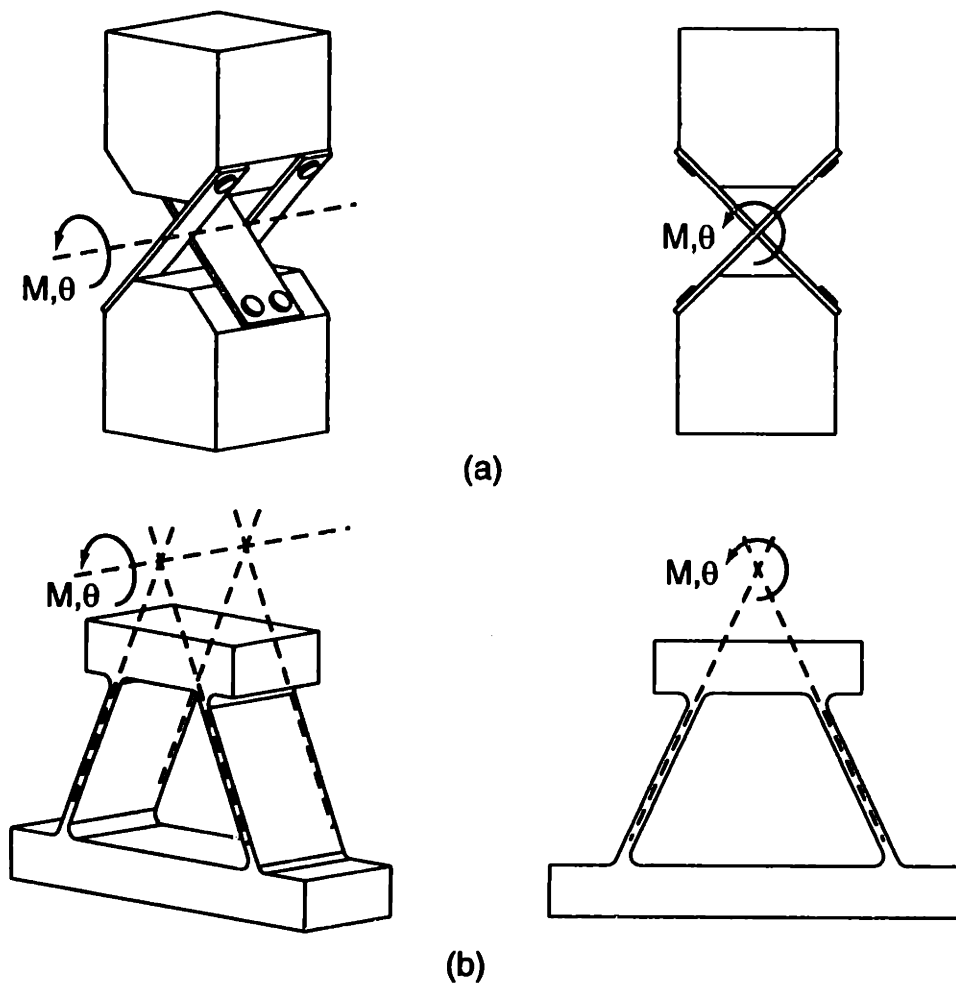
Cross strip flexures. (a) clamped design (b) monolithic design
